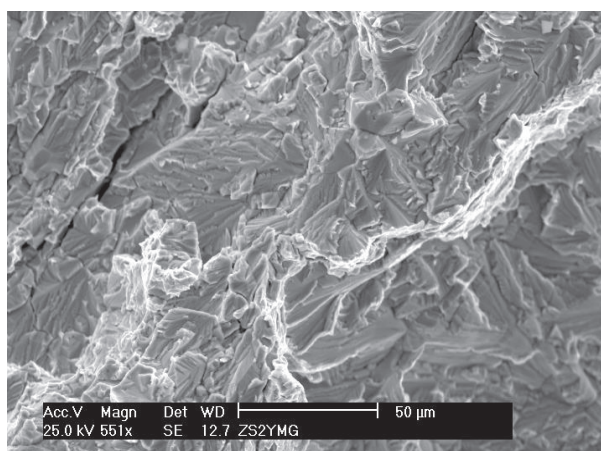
Fracture surface of "2Y" welded specimen after SSR test in boiling MgCl_2 solution at 125°C
